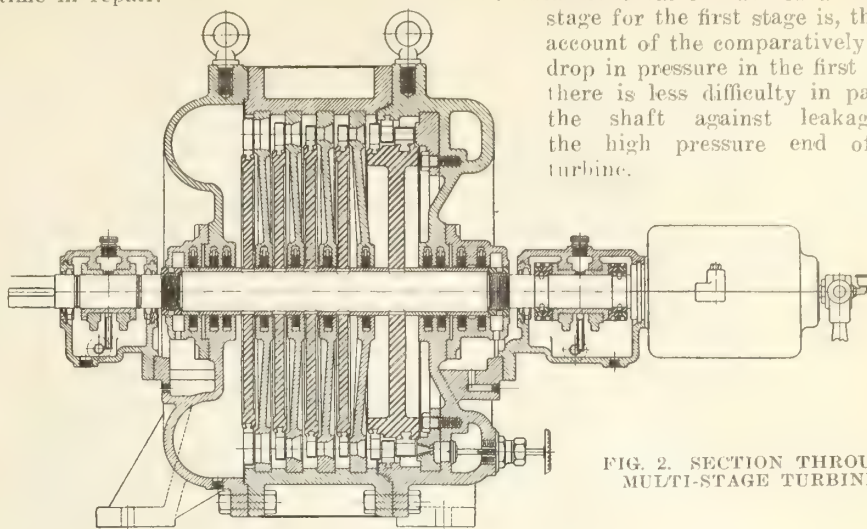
SECTION THROUGH MULTI-STAGE TURBINE.
